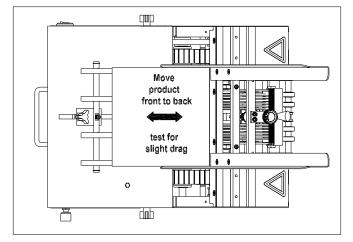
Using One-Piece Thickness of Product to Set Gap
